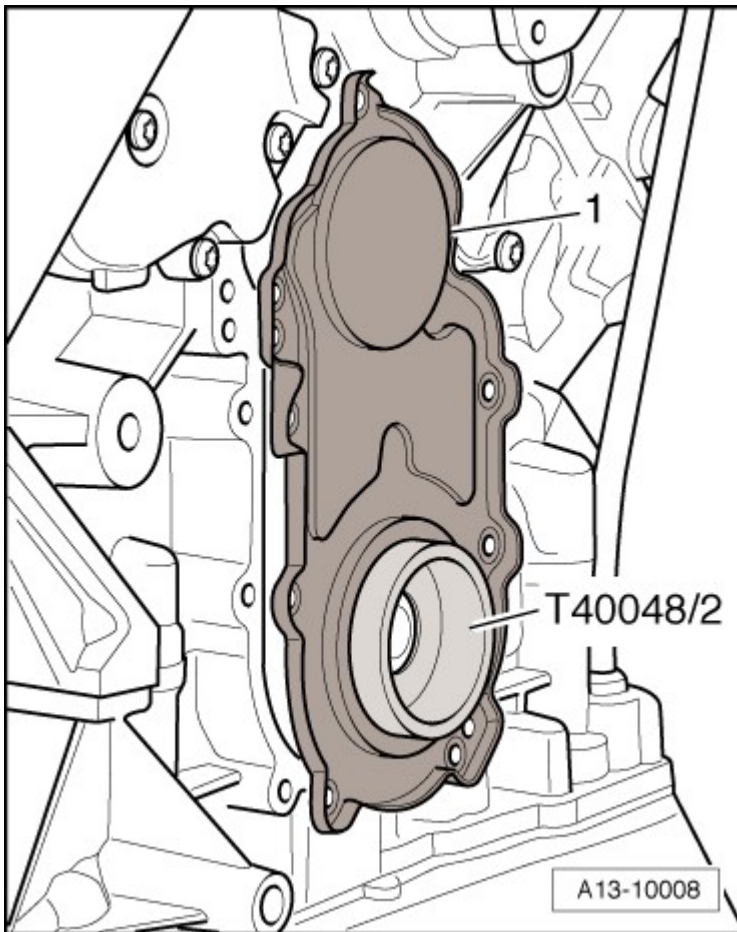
Placing Sealing Flange With Inserted Pull Sleeve T40048/2 Onto Crankshaft
